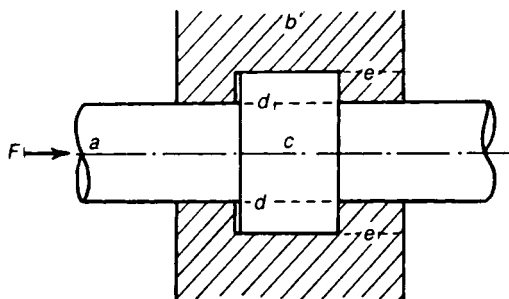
Shearing stresses in a rivet; shearing forces  $F$  is transmitted over the face  $ab$  of the rivet.
